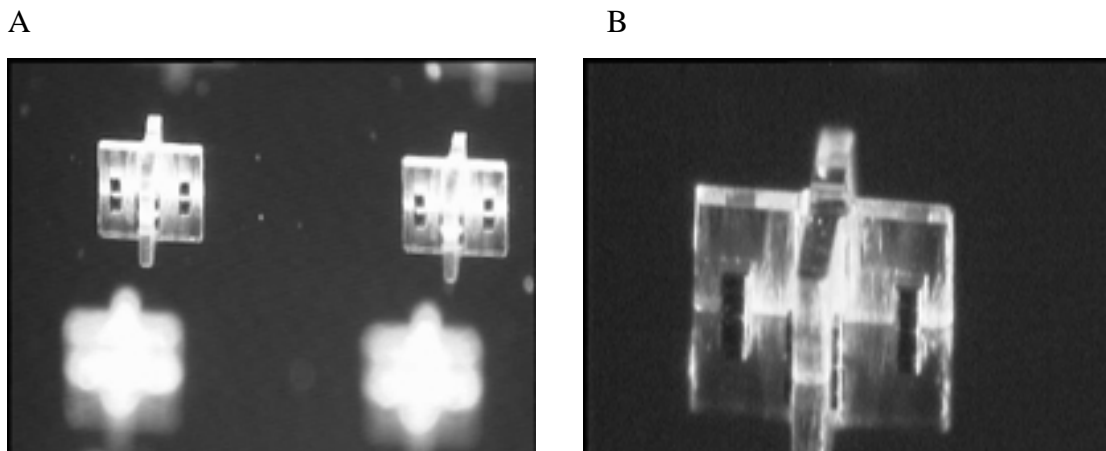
(A) Side view of multiple parts. (B) Side view of single part.
